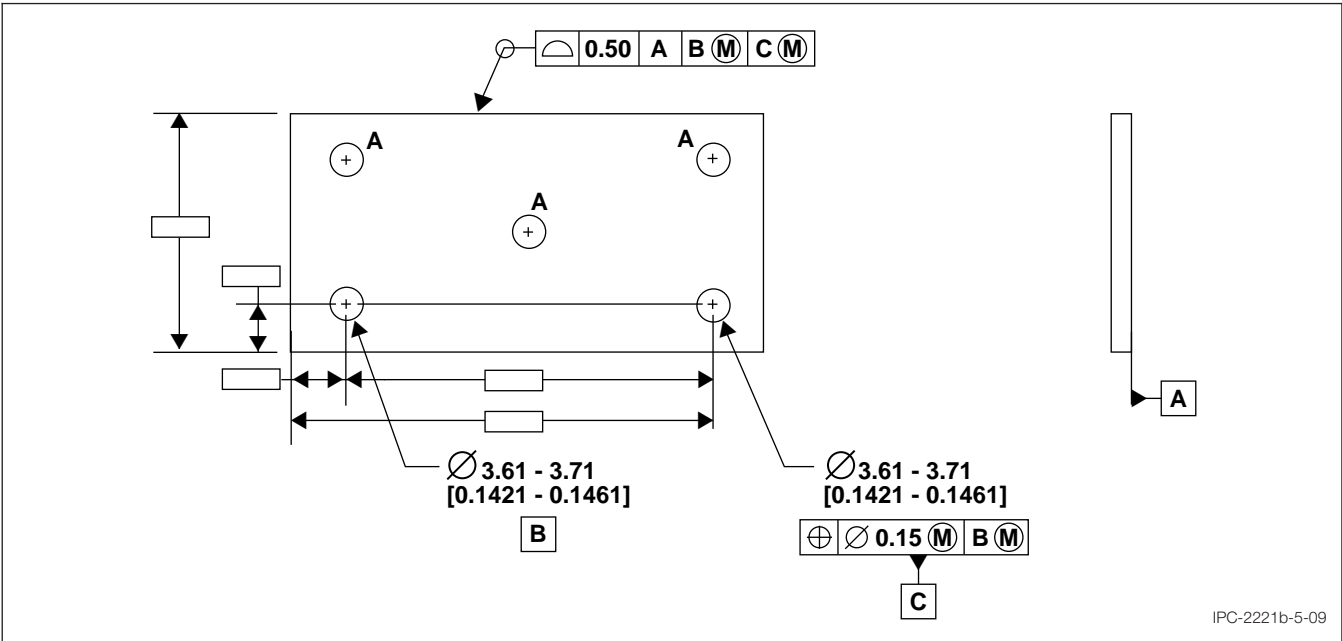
Example of Printed Board Profile Location and Tolerance, mm [in]
